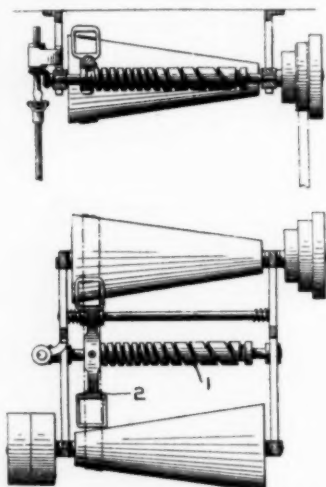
COUNTERSHAFT FOR CUTTING-OFF MACHINE TO GIVE CONSTANT CUTTING SPEED
